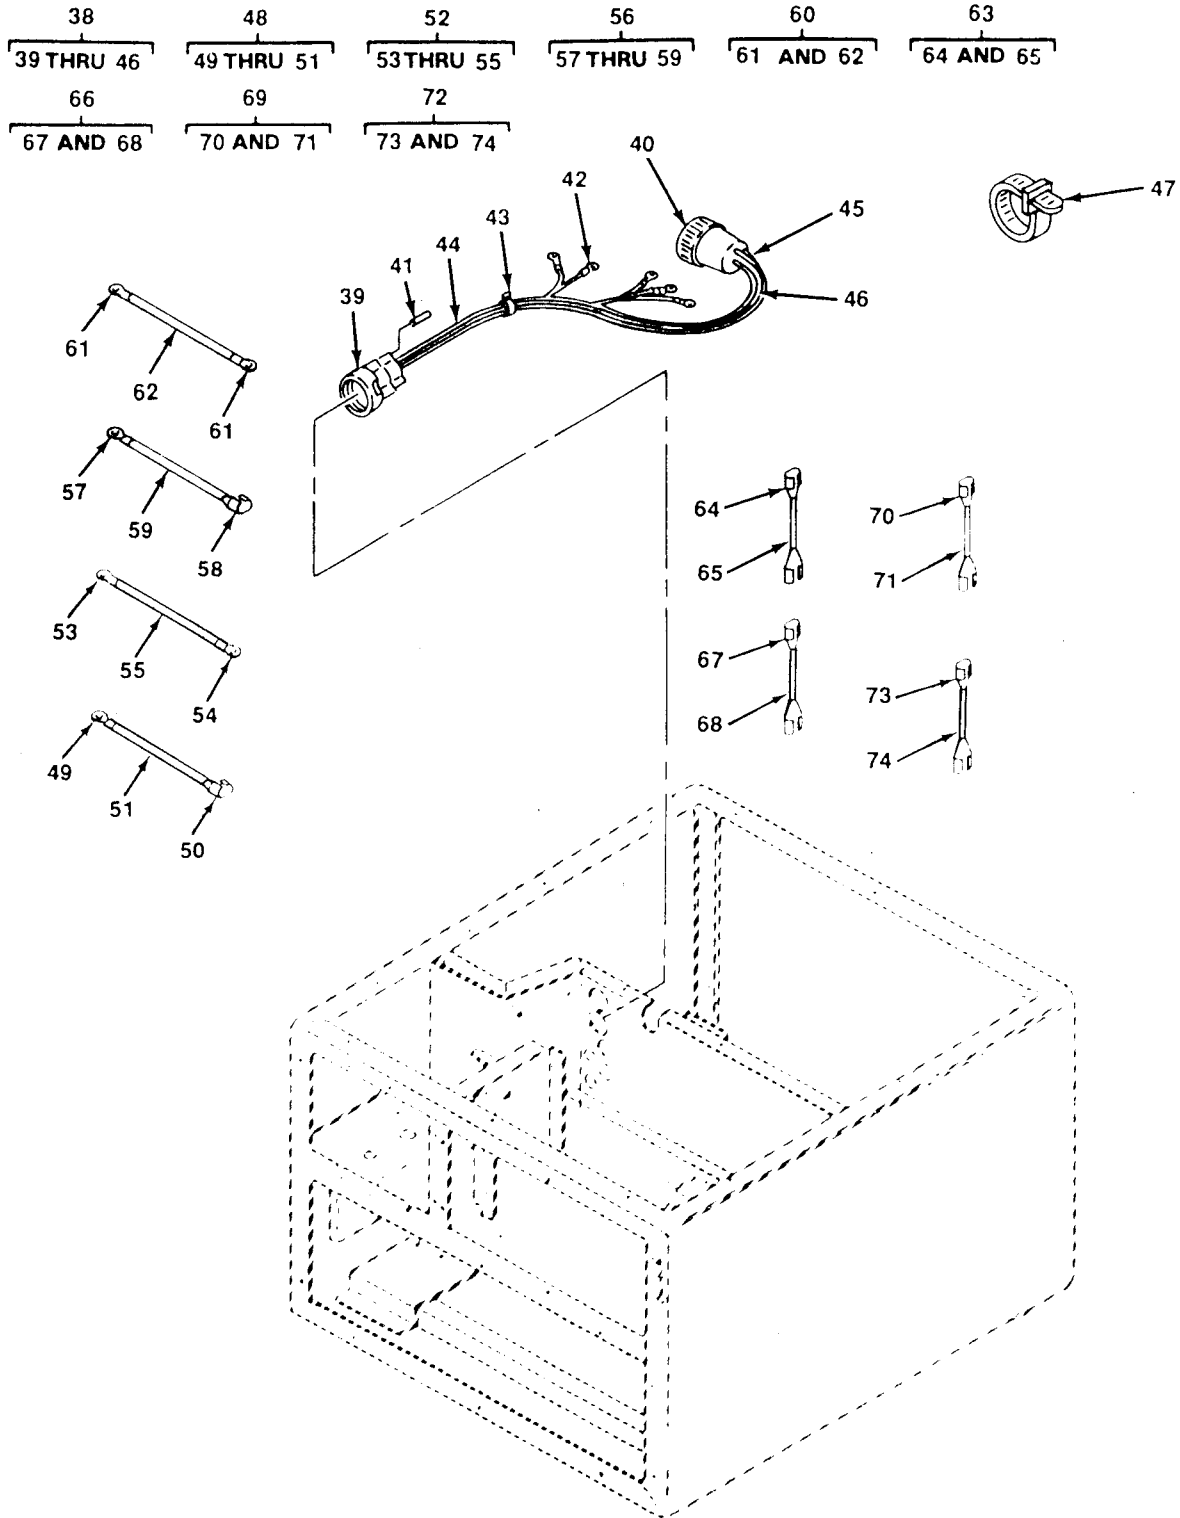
Wiring Harness and Terminal Boards (Sheet 1 of 2).
